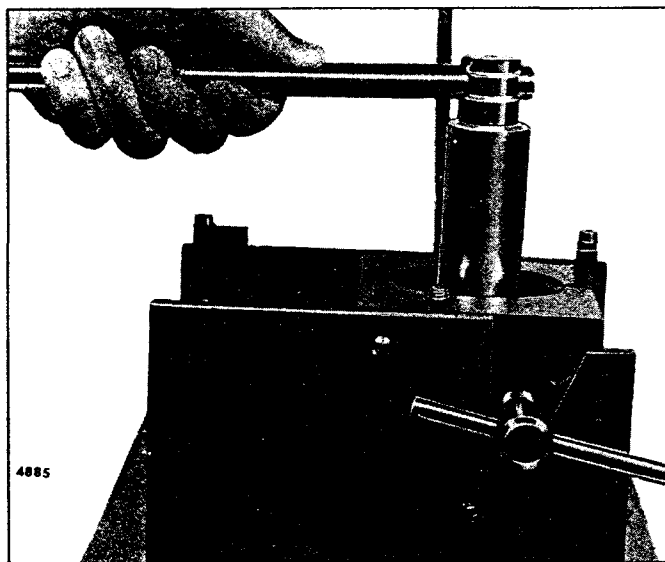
Removing Injector Nut Using Tool J 4983-01
